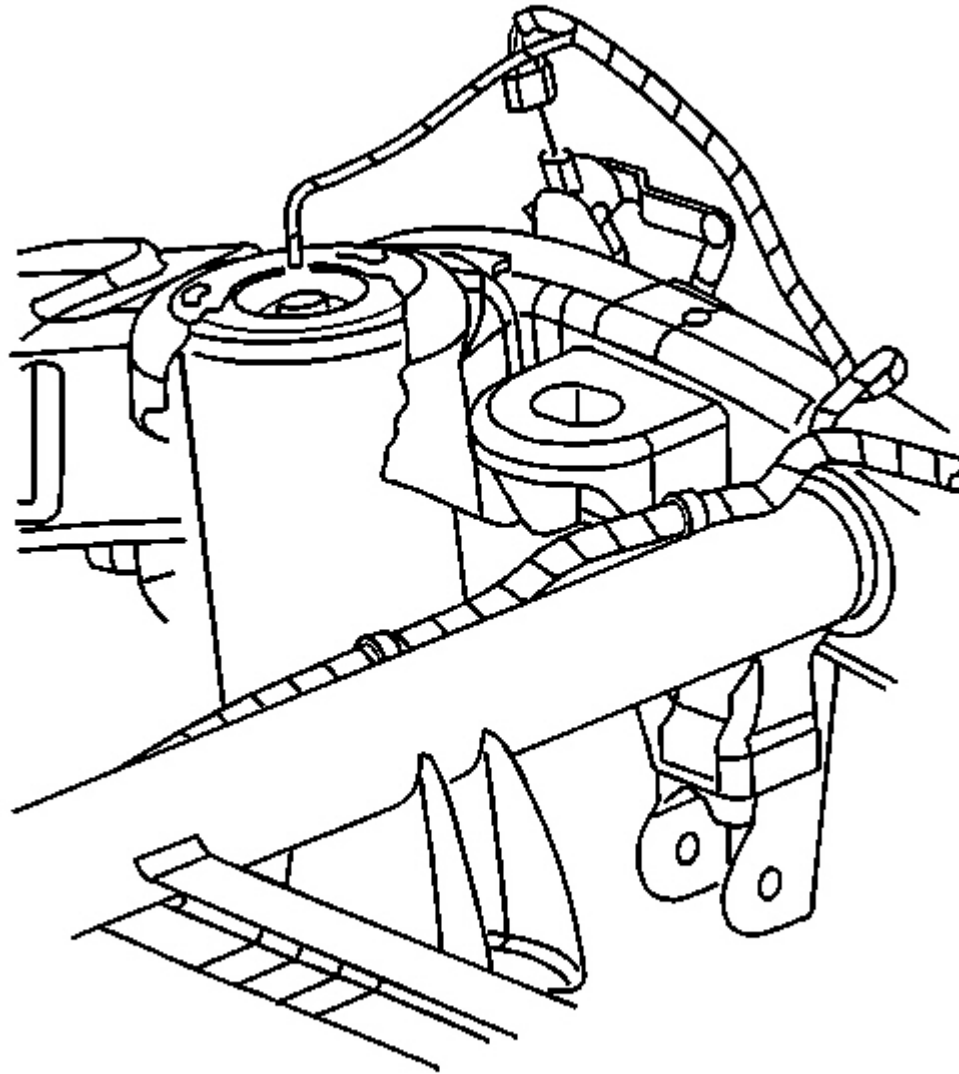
View Of Air Spring Level Sensor Electrical Connector
